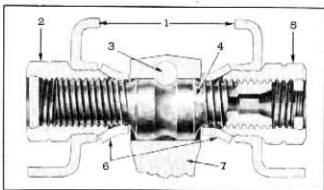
Upper Control Arm Pivot Pin and Bushings
